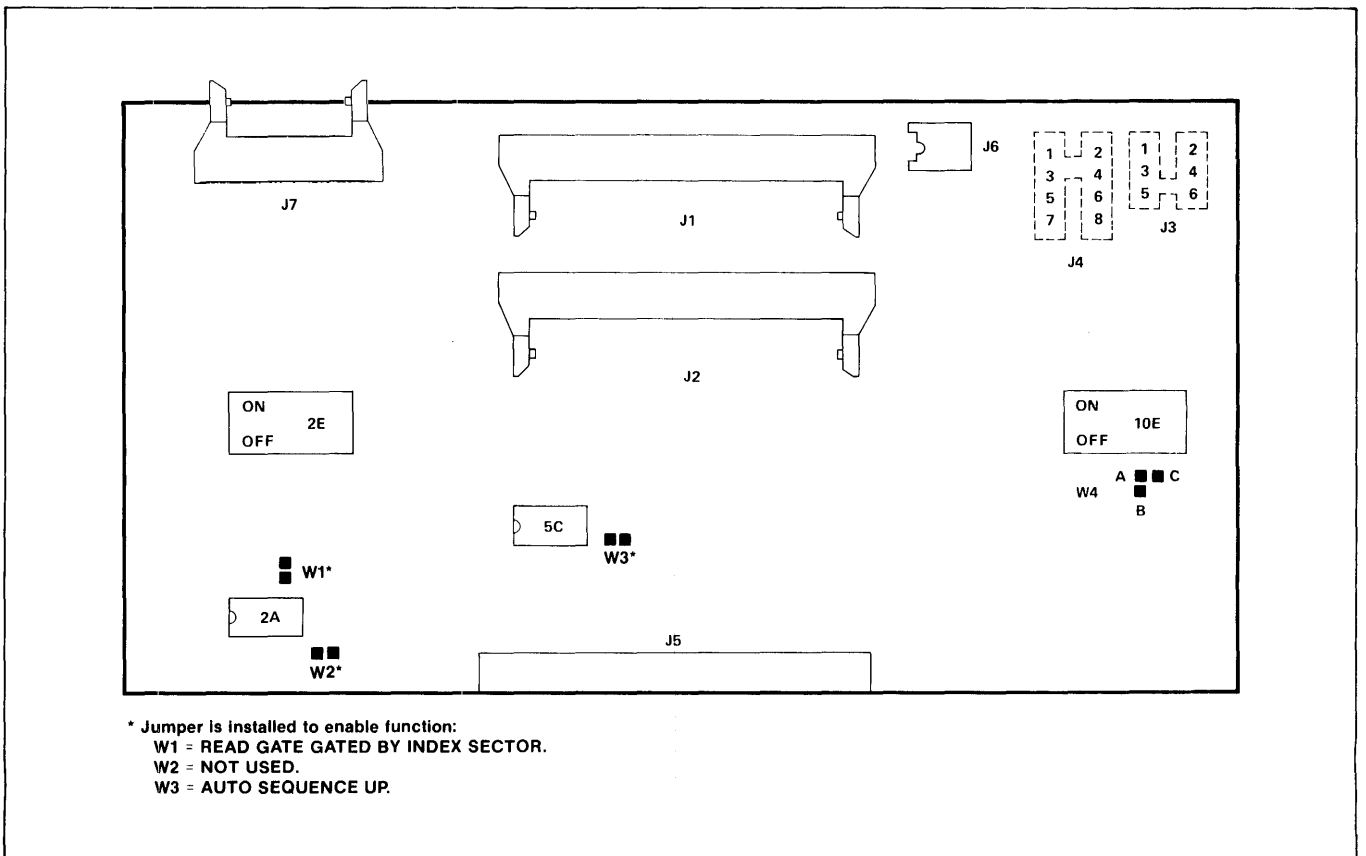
DIP Switch and Jumper Locations for PCB Assembly 200218/200263
